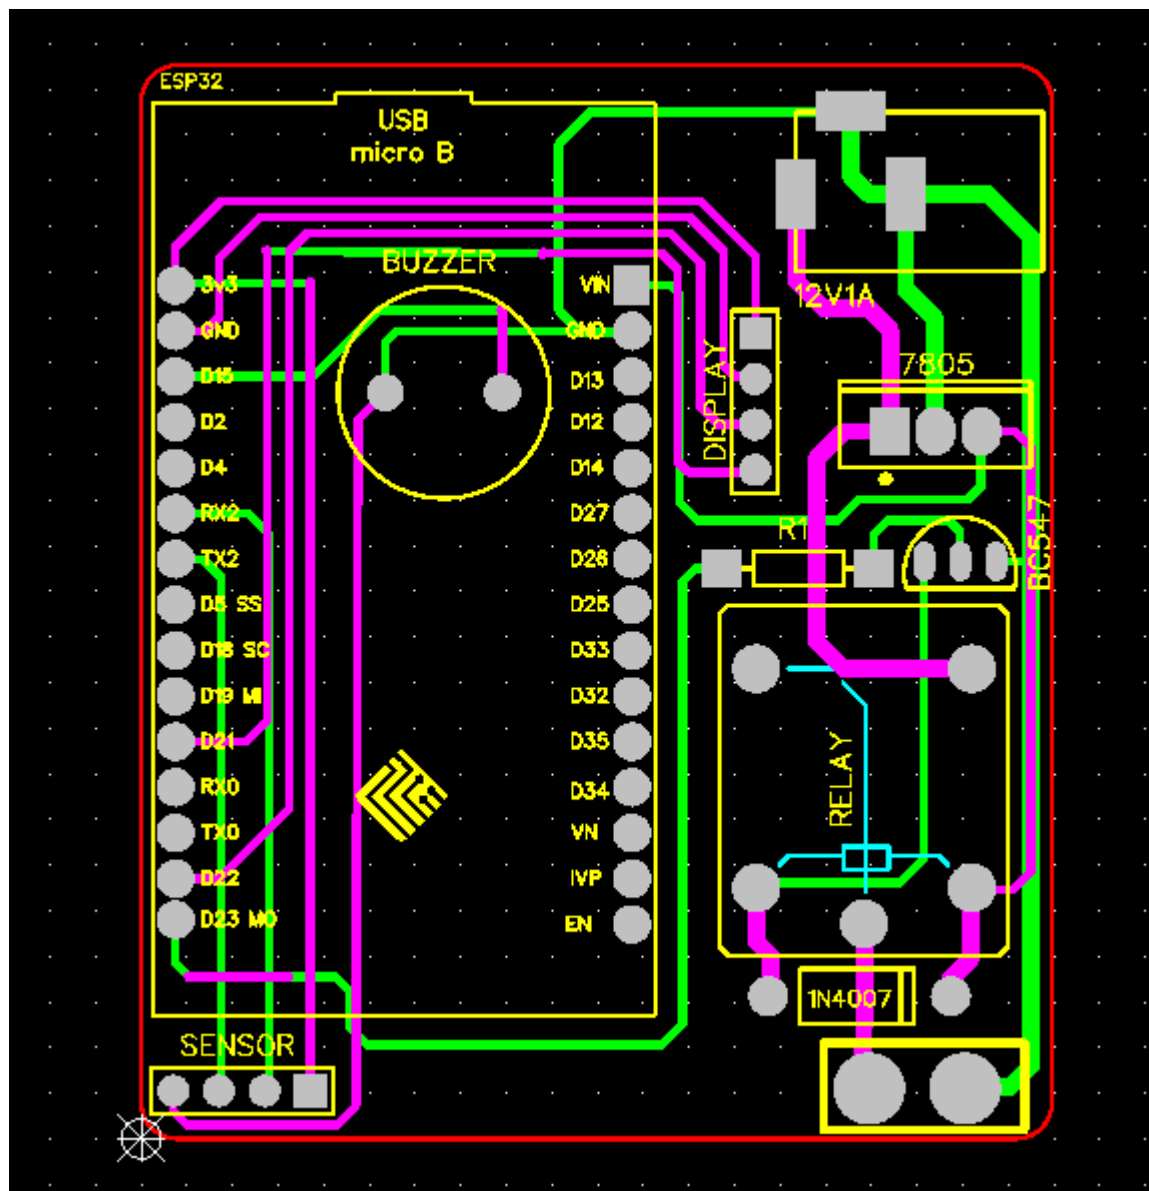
Image Insert Of Most Optimized Circuit Print Circuit Board (PCB) Layout
